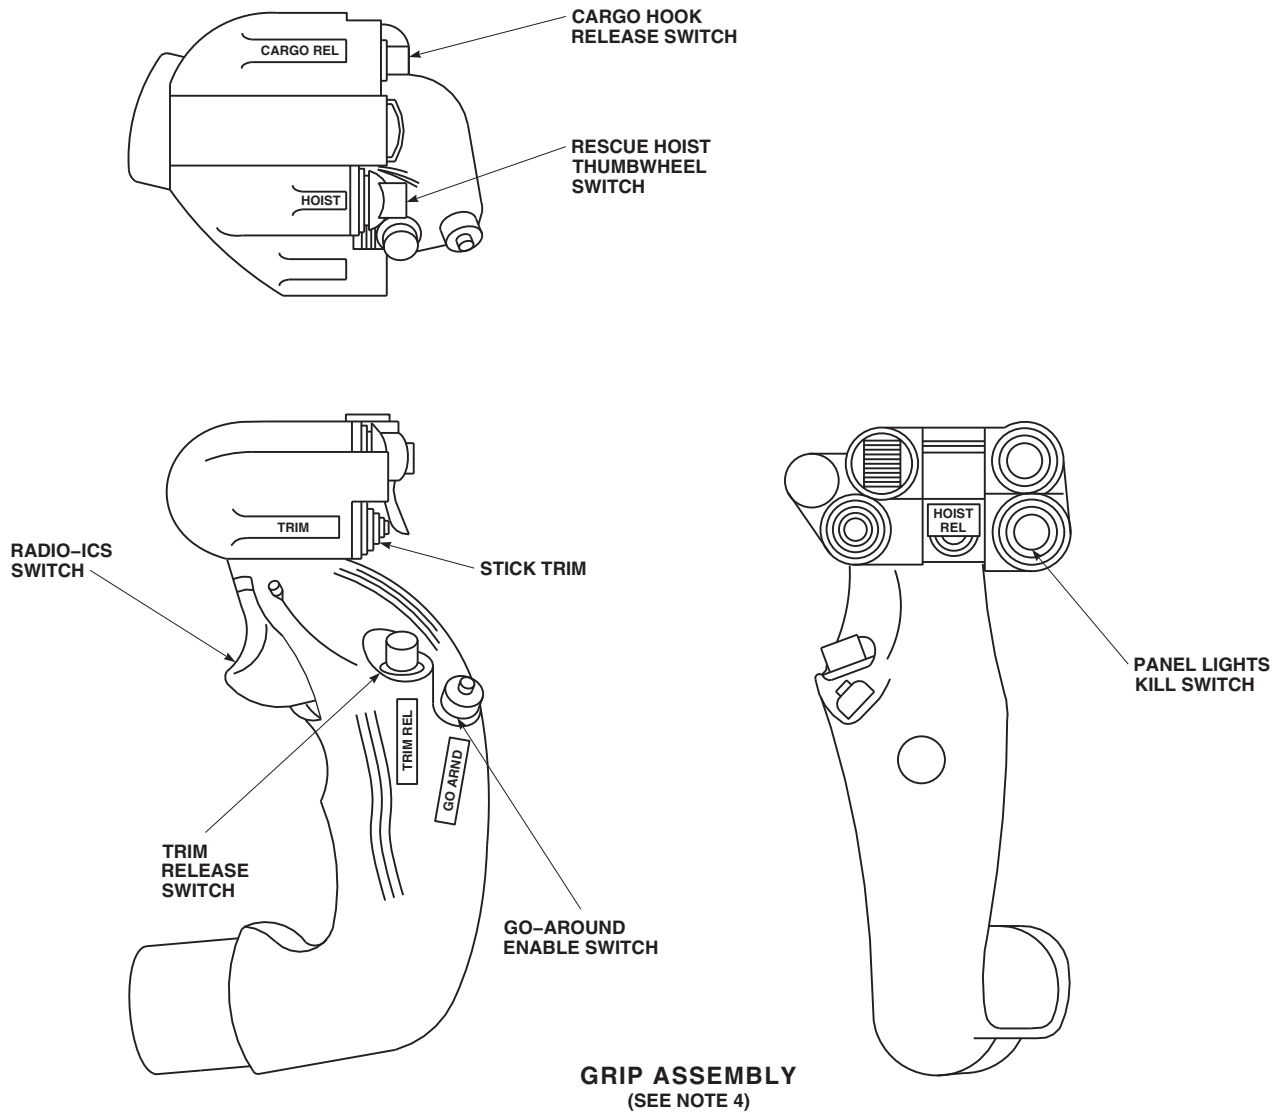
CYCLIC STICK ASSEMBLY (SHEET 1 OF 3)
